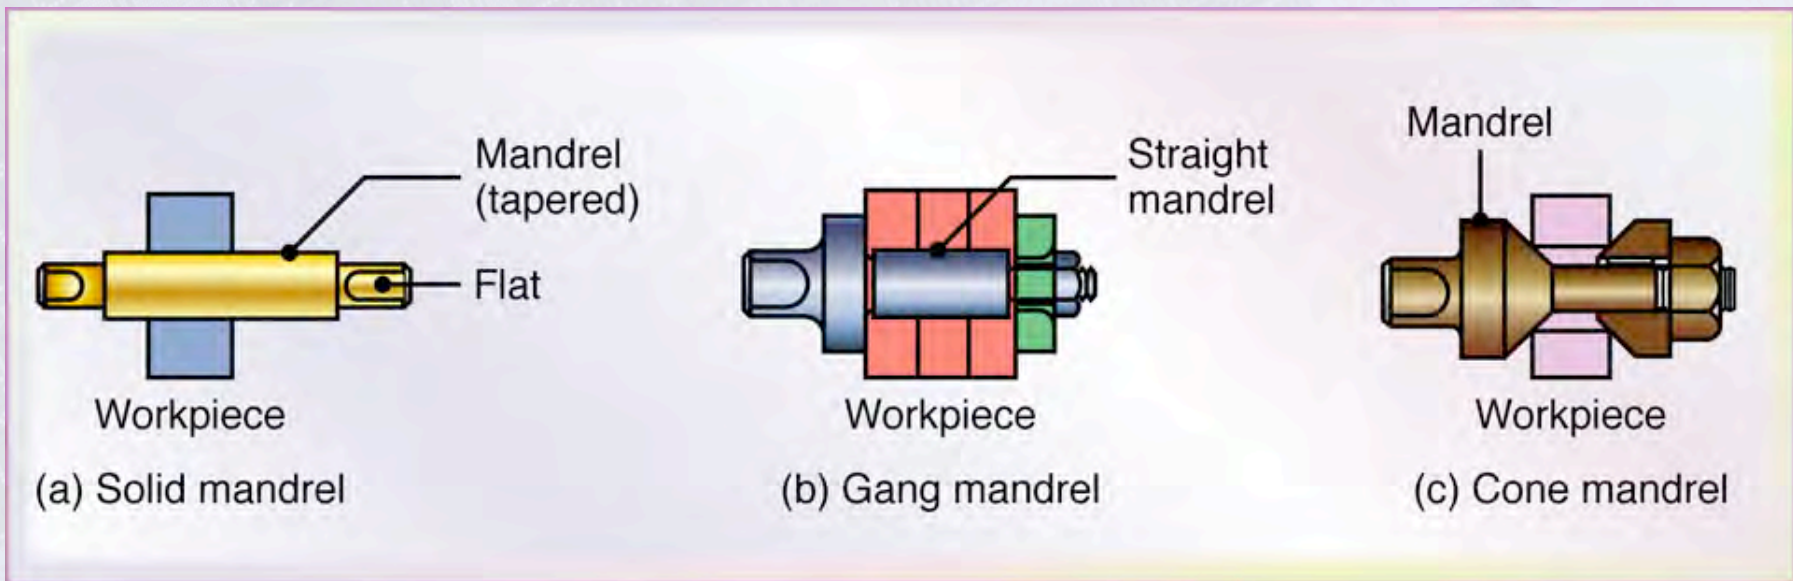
Various types of mandrels to hold workpieces for turning. These mandrels usually are mounted between centers on a lathe. Note that in (a), both the cylindrical and the end faces of the workpiece can be machined, whereas in (b) and (c), only the cylindrical surfaces can be machined.
